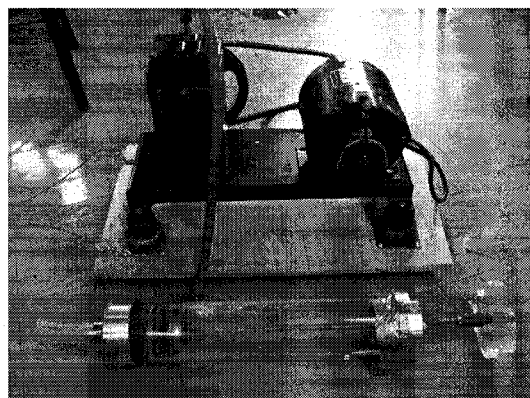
The assembly drawing of the casting module for making flexible plates from silicone rubber (Silastic RTV).
